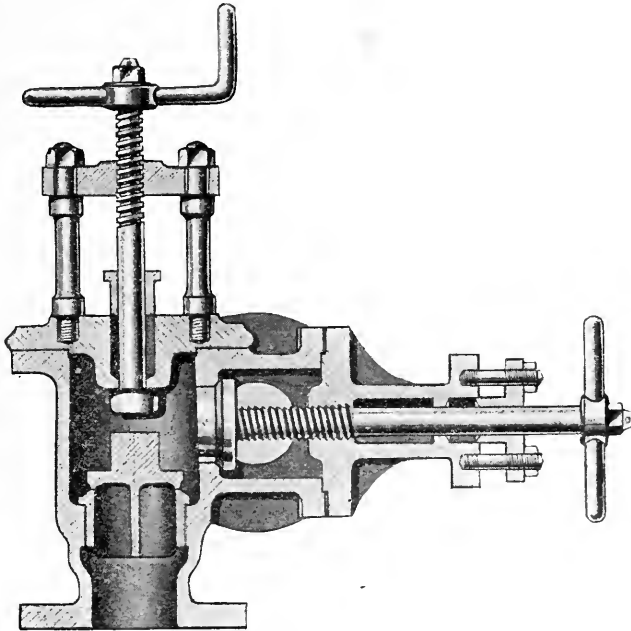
Feed Check Valve with Shut-off Valve Added.
